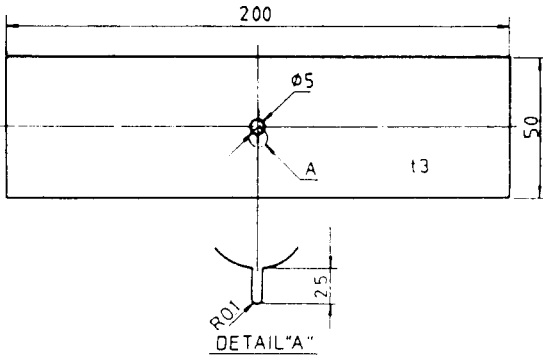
Geometry and dimensions of the fatigue test specimen (units : mm)
